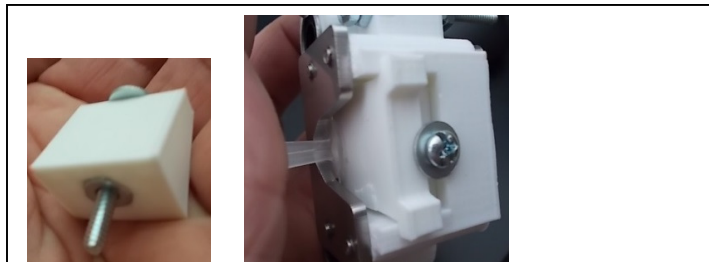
Plunger holding assembly on carriage. On left is a view of the inner wedge fitted with #6 nut. The view on the right shows inner and outer wedges assembled into carriage. Tightening the screw presses outer wedge against syringe plunger
